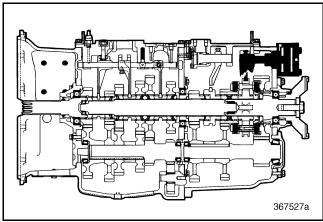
Range Shift Cylinder Component Locator (T313L/T318L Shown)
